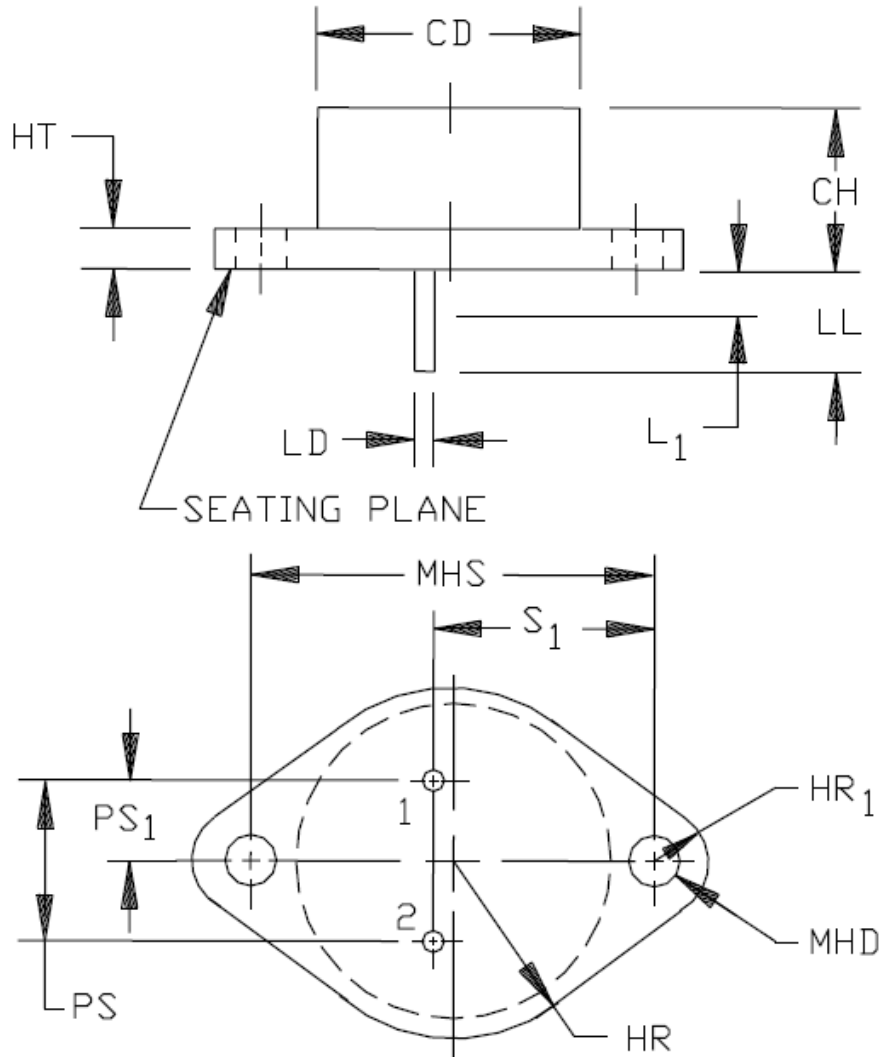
Physical dimensions (TO-204AA, formerly TO-3)
